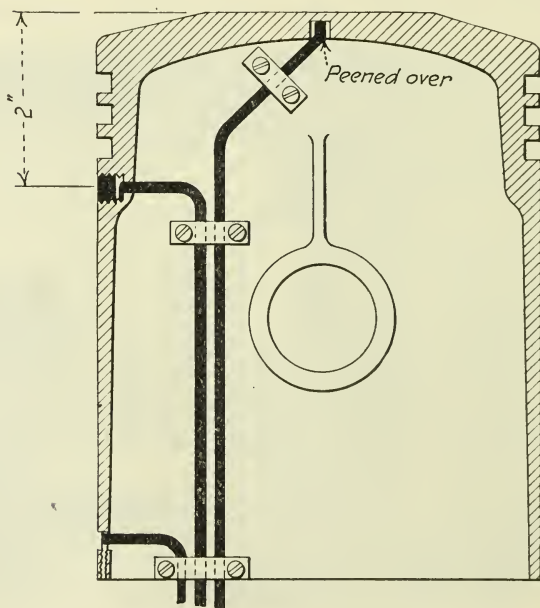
METHOD OF FASTENING THERMOCOUPLES IN PLACE IN THE PISTON
